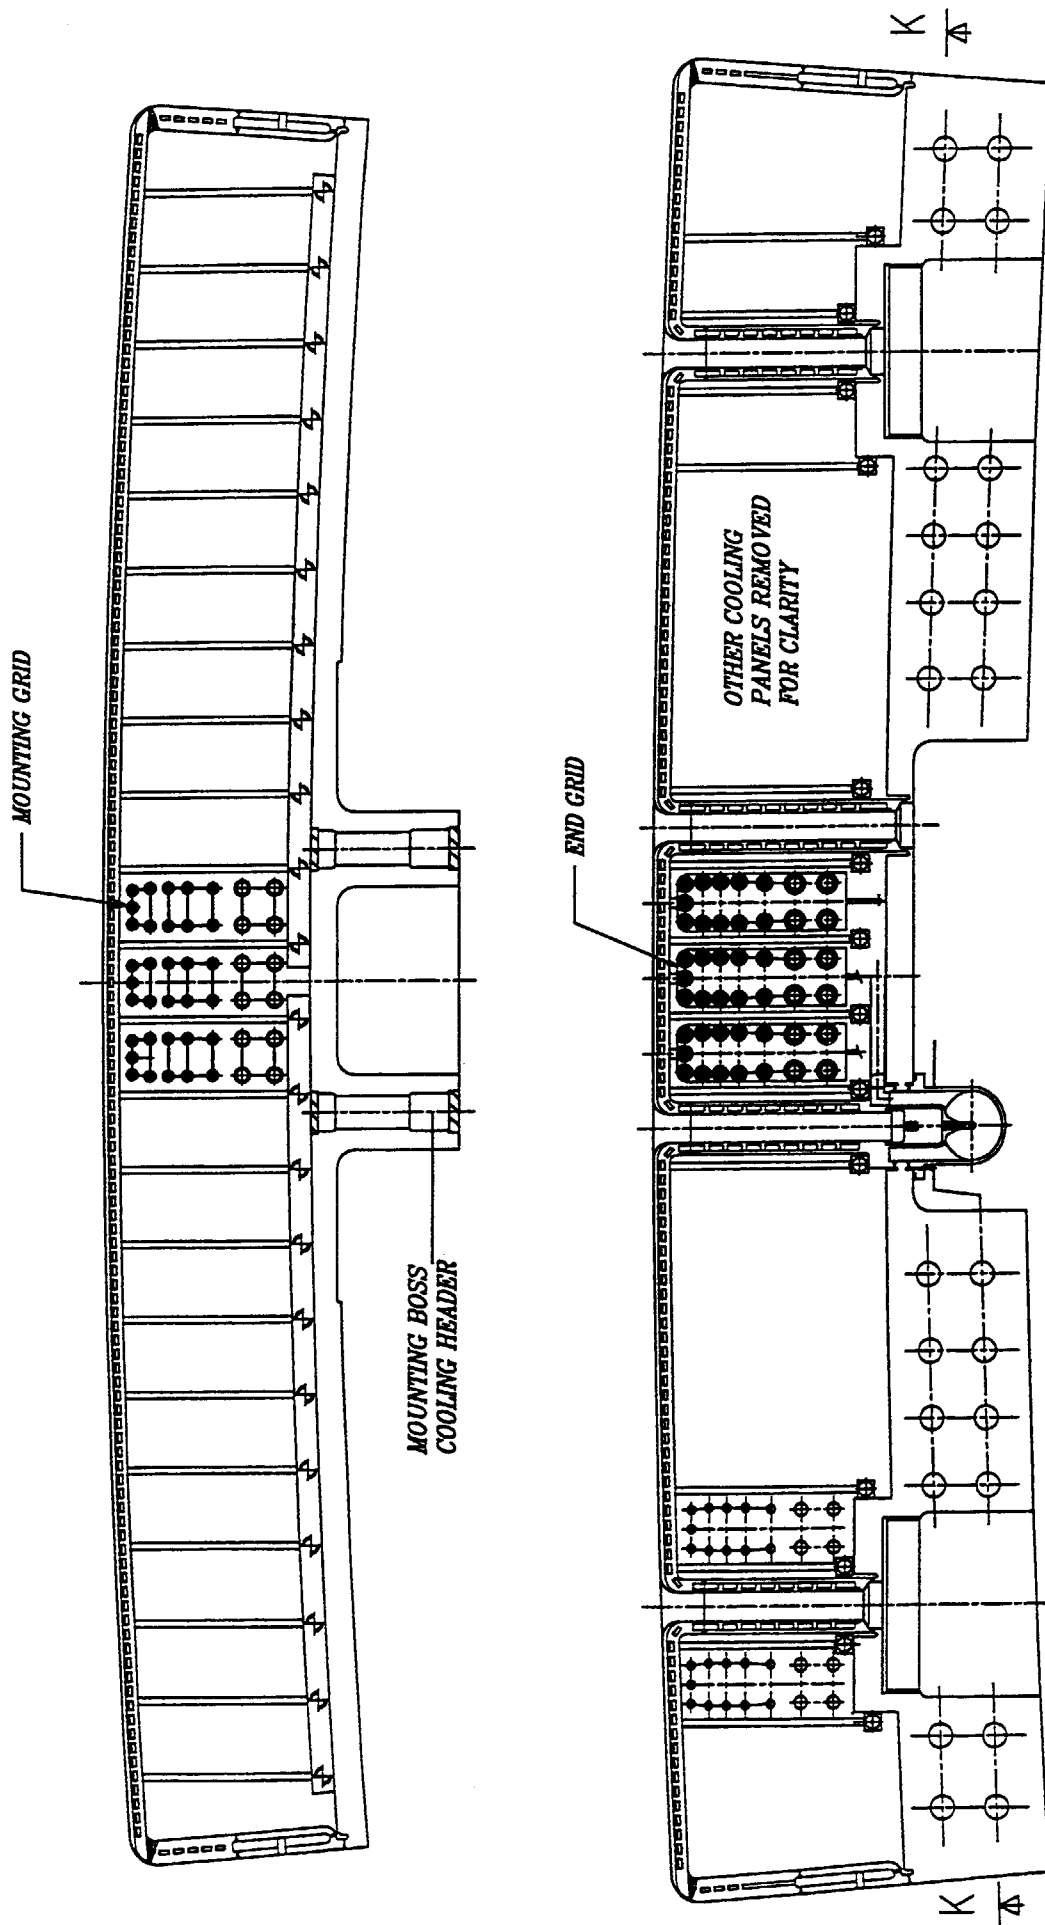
Breeding blanket concept - inboard No. 11 module [1]
